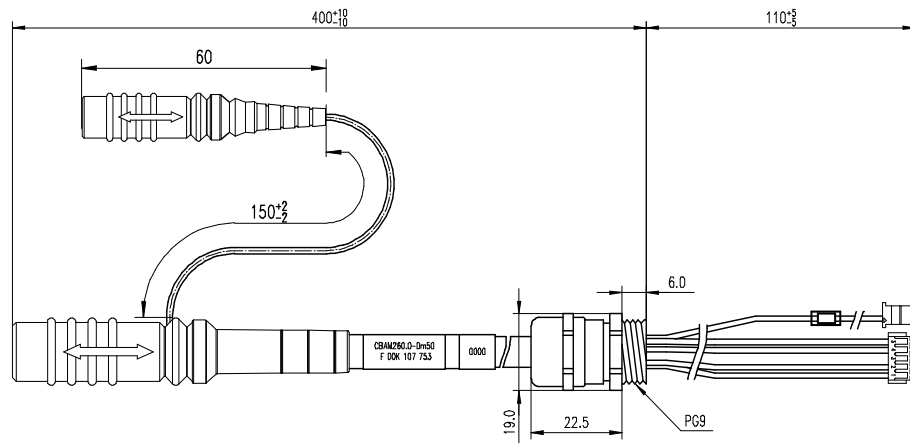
Combined Interface and Power Supply Cable CBAM260
